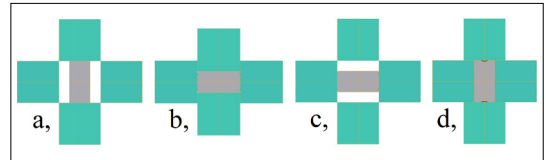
Schematic figure of two consecutive forging steps while maintaining the position of the workpiece (gray). Starting position (a), final state of the first forging step (b), tools move back to their initial position (c), end of the second forging step (d)
